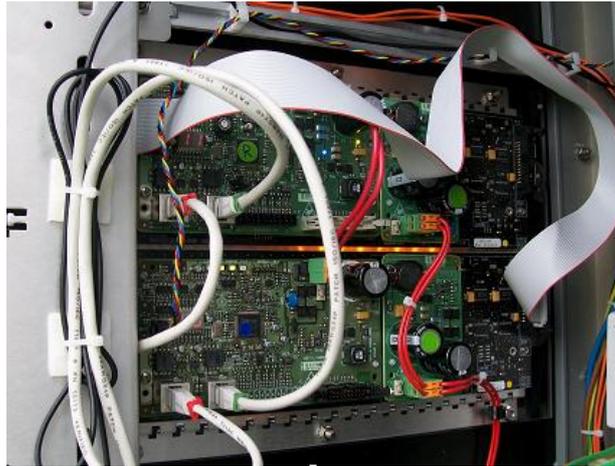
Graphical arrow comprised of 2 x 100mm Character PCB Assemblies
